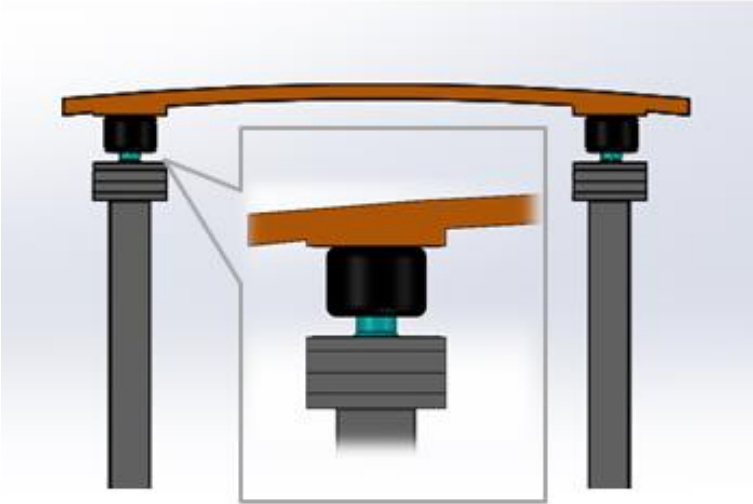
Air spring mounting between reinforcing bars and chassis rail
